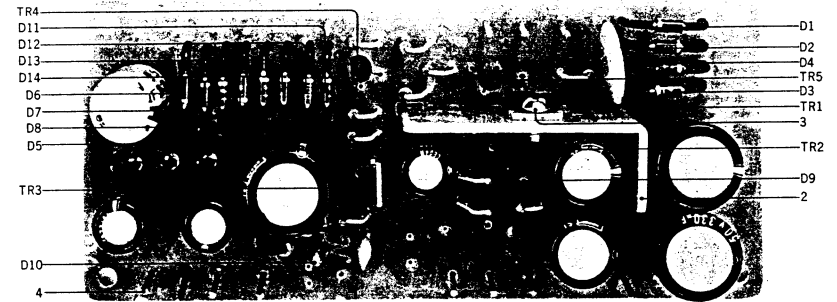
PHOTO OF EQ. P.C. BOARD (98-5008)
